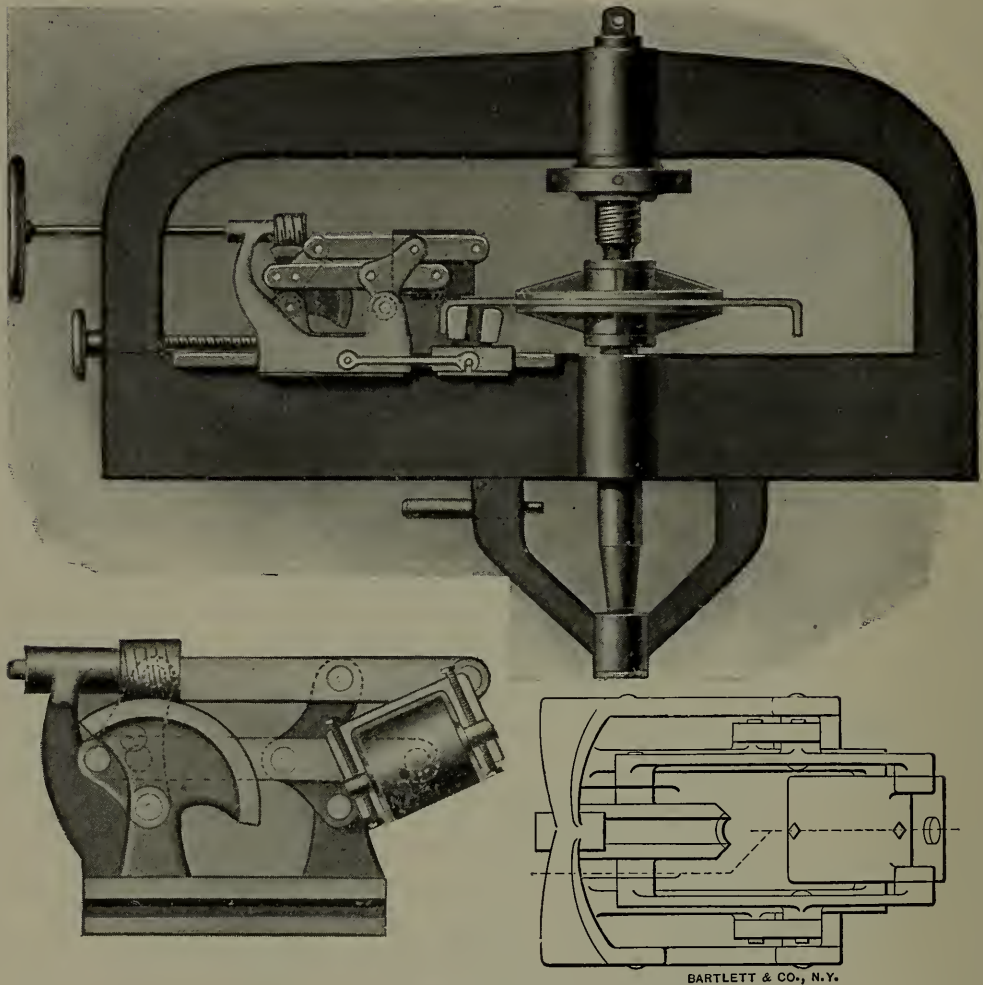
BOILER HEAD FLANGING MACHINE DETAILS.
